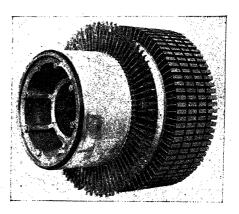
Completely Assembled Armature Core and Commutator Ready for Winding (Front View) Courtesy of General Electric Company
